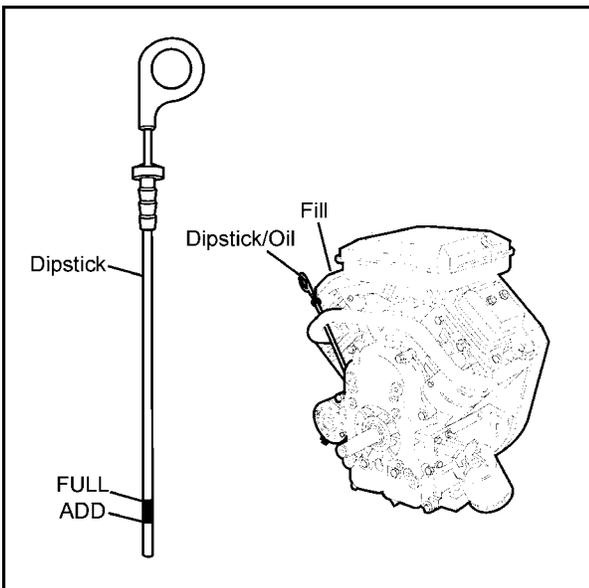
Oil fill and level location BRIGGS & STRATTON engine.
